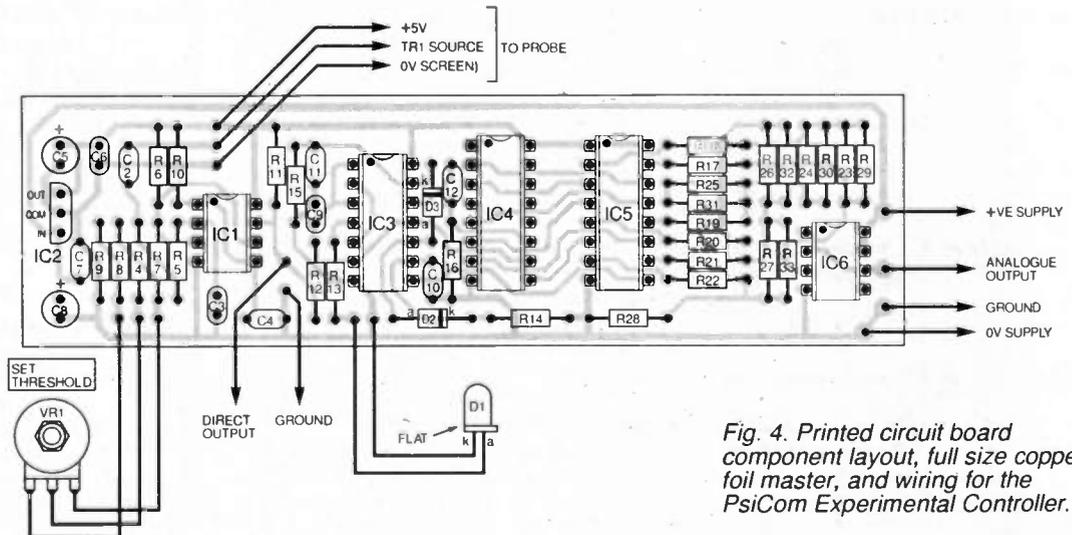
Printed circuit board component layout, full size copper foil master, and wiring for the PsiCom Experimental Controller.
